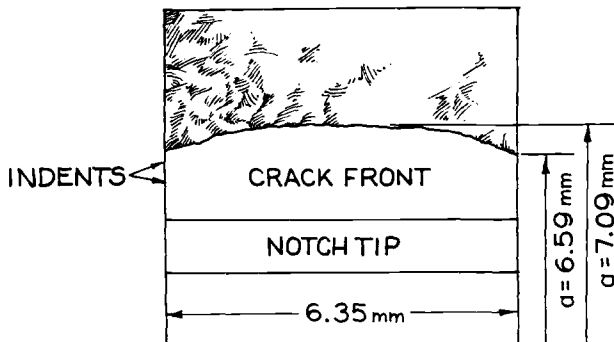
Drawing of a typical shape of a fatigue precrack.
